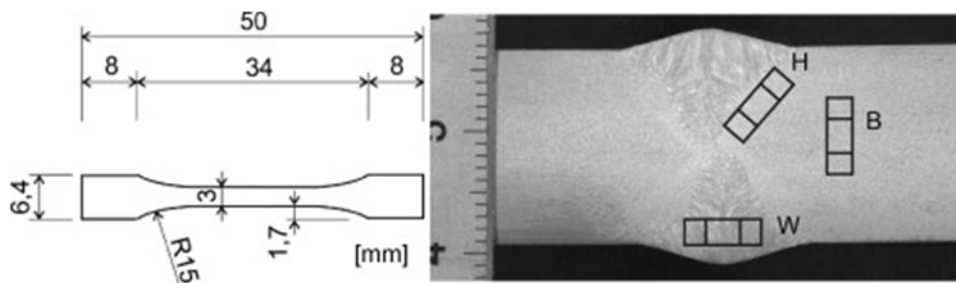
Geometry and dimensions of miniature tensile test specimen [48].
